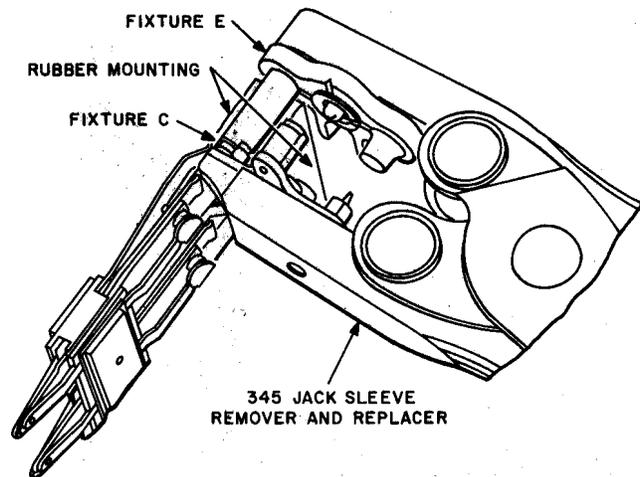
Method of Forcing Sleeve Forward, Flush with Face of Rubber Mounting on 92-, 229-, and 292-Type Jacks
